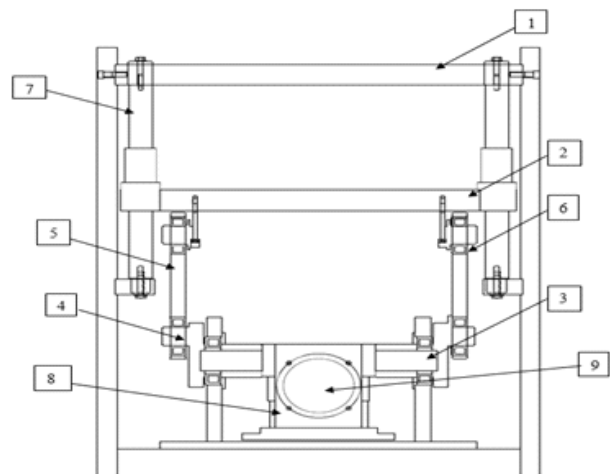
Forming & Cutting Die pillar station of Vacuum forming Machine.
